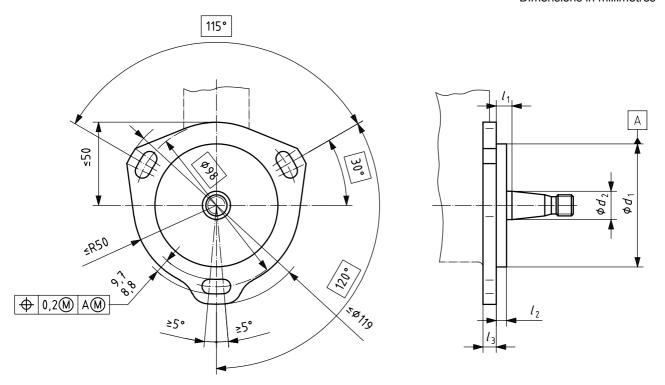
Fuel injection pumps — Type 5 end-mounting flange
